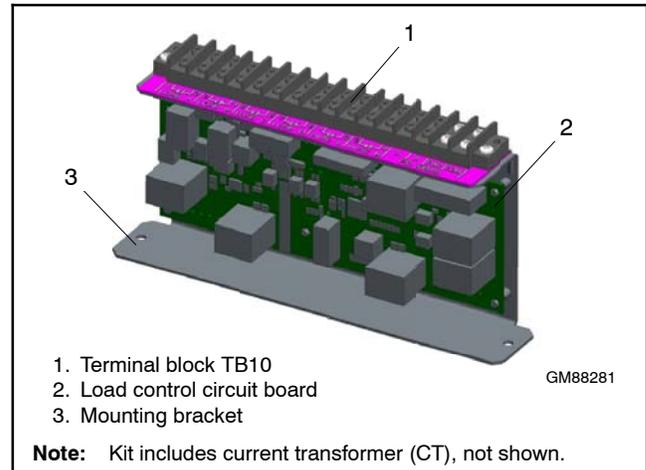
Load Shed Assembly GM88281-1 (mounts inside the transfer switch enclosure)
